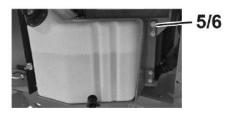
Assembling the fuel tank 5. Bolt 6. Washer
